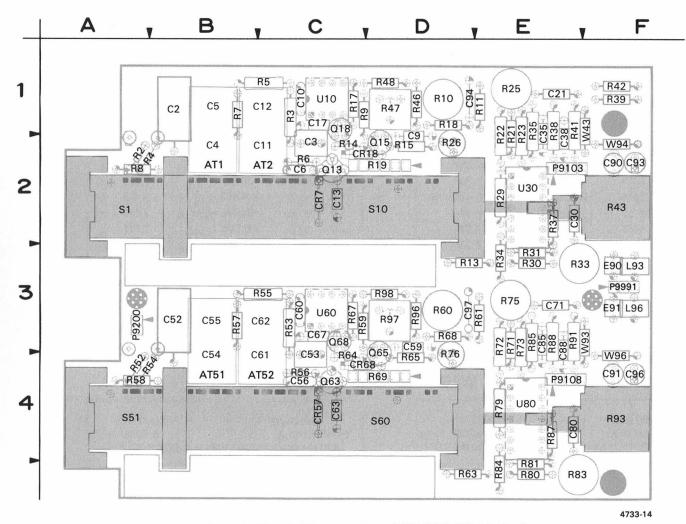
B. A2-Attenuator board (SN B020966 & below).
